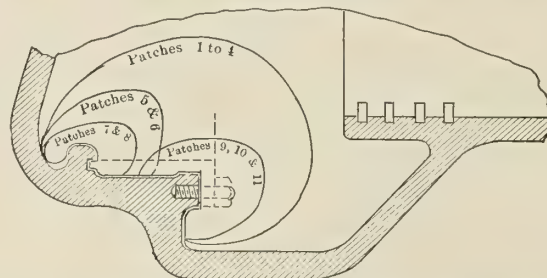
Approximate Section Across Impulse Wheel Exhaust Belt, Showing Detail of Electric Weld Patches. Starboard H. P. Astern Cylinder, Bottom Half
